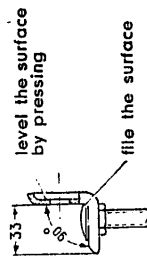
Modification of the clamping holder LEBE 34 L 6 Z
